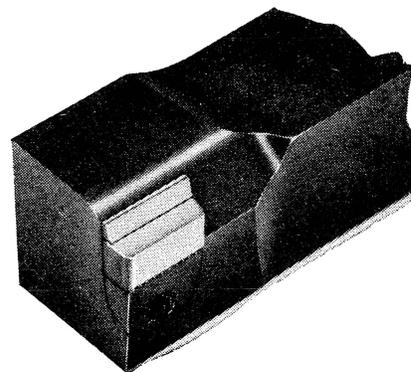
Holder for straight turning tool ("S-70-RKVB") with adjustable clamped chip breaker. (Courtesy The Viking Tool Co, Shelton, Conn)
